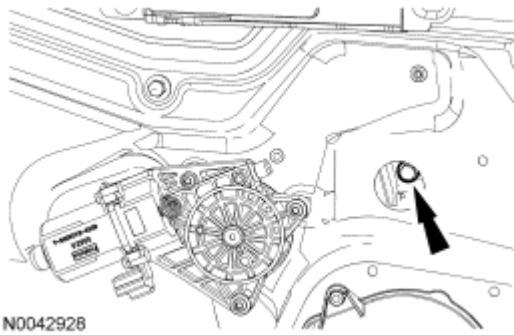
Locating A-Pillar Front Door Window Glass Clamp Bolt
